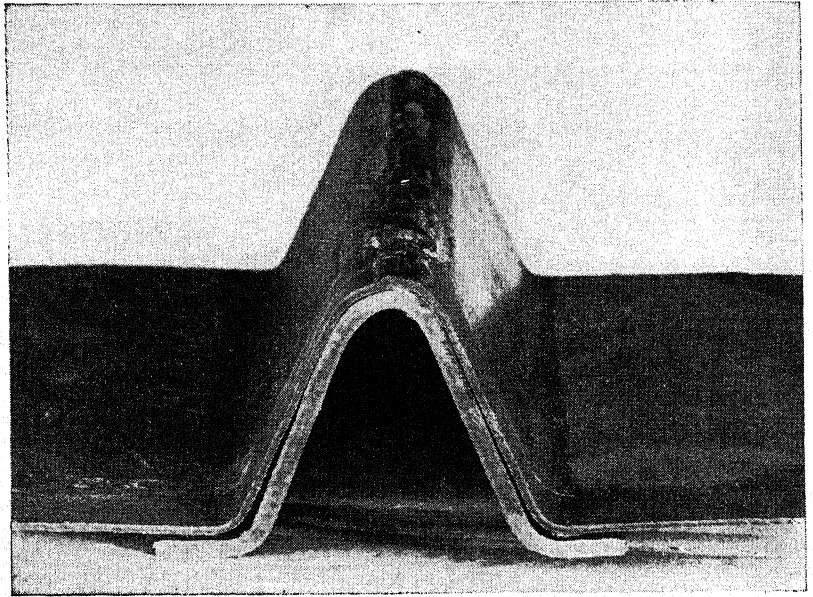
Section through weld, showing fusion to carline and roof sheets.
